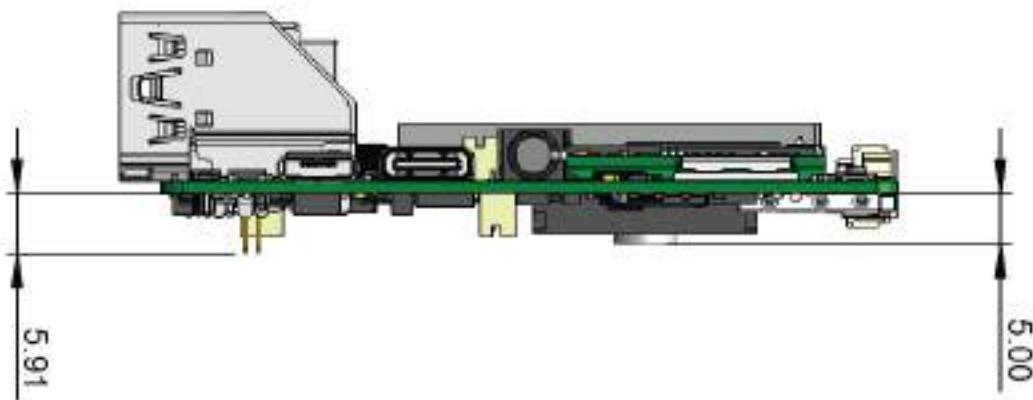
Mechanical Dimensions of i.MX 8XLite Pico ITX SBC Side View-2
